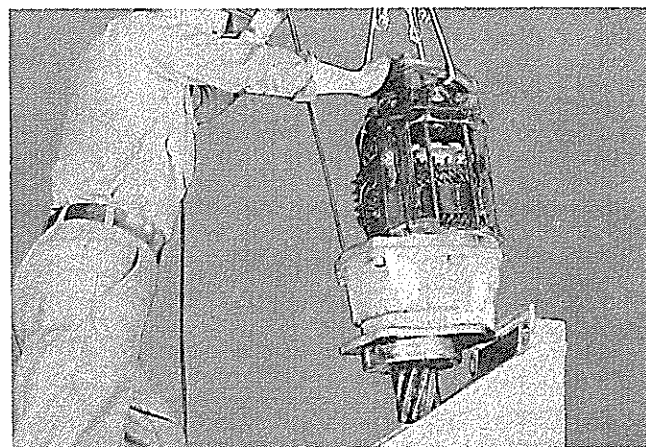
REMOVING MOTOR AND GEAR BOX
